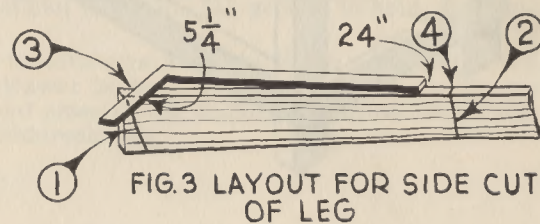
LAYOUT FOR SIDE CUTS OF LEG
